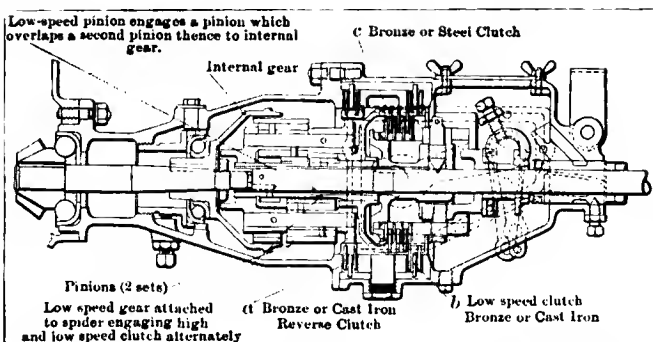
Planetary gear set, showing multiple disc clutches, system of gears, and screw system of engaging the high speed
